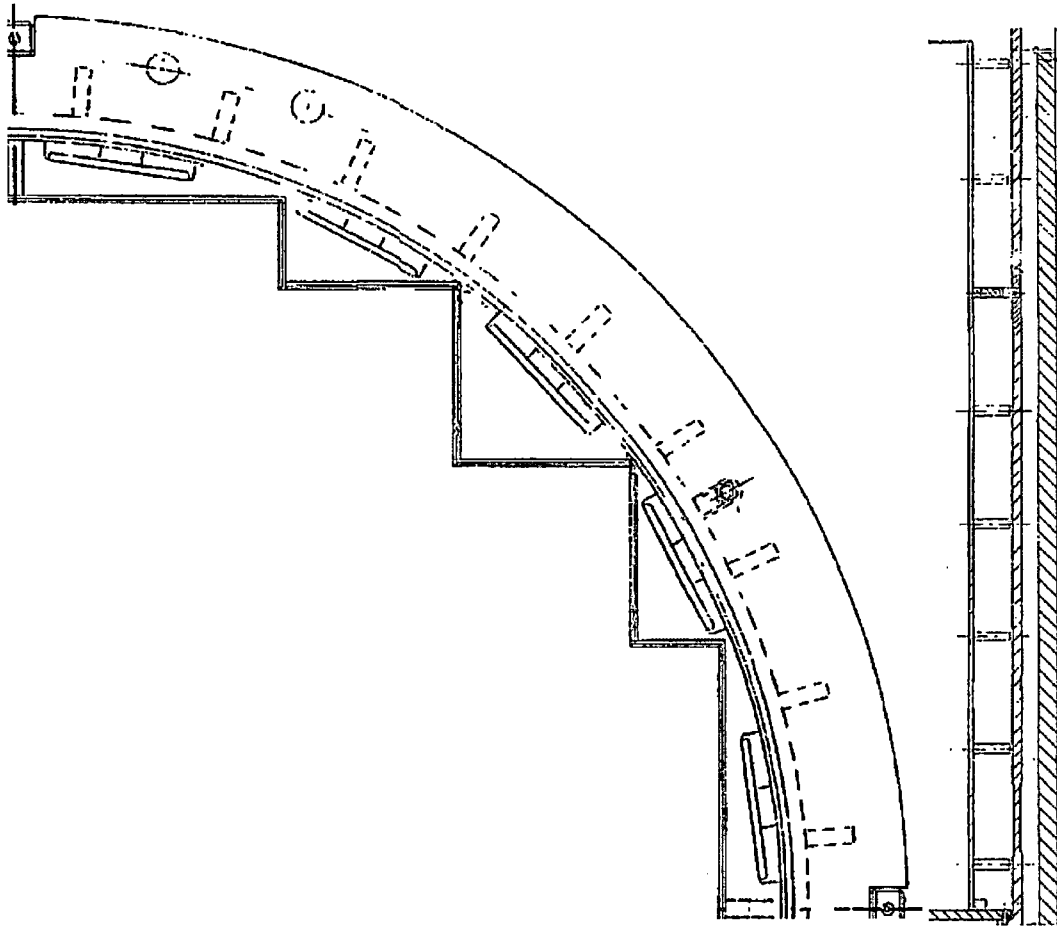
Palisades Core Shroud Channel and Former Plate Design
